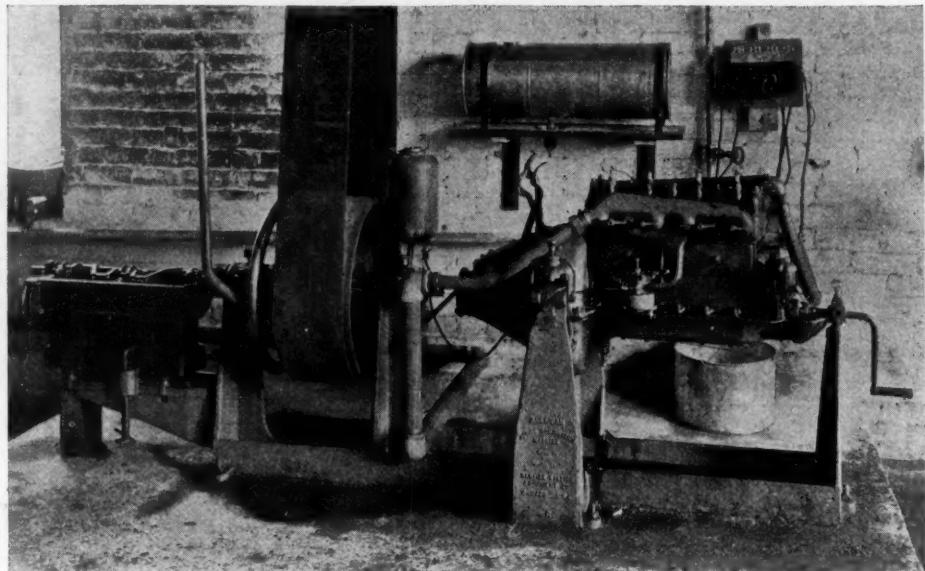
A view of the American Junior Universal burning-in and running-in machine with a Ford block on the burning-in side and an assembled Ford engine on the running-in side. This particular machine is manufactured by the Fairbanks Co. of New York
